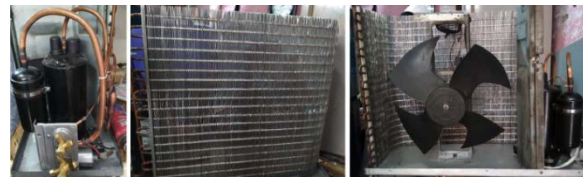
Installed Compressor, Full Condenser, after Installation of cooling fan
